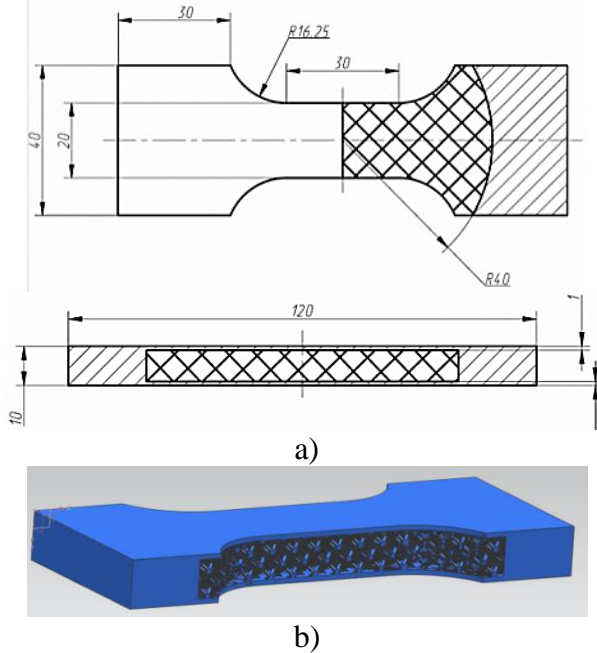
Lattice structure sample for tensile tests: a) drawing, b) model
